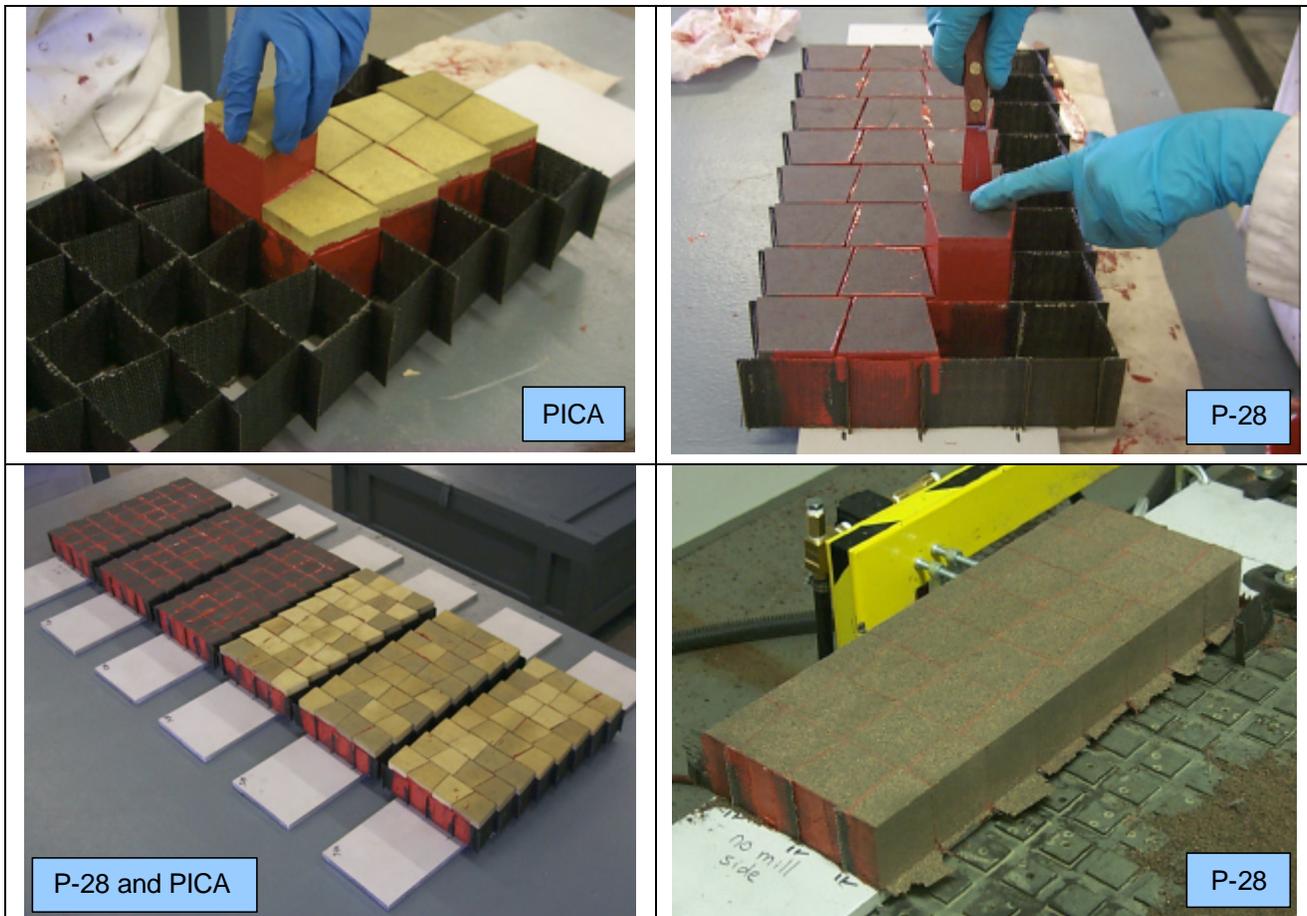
Production of PICA and P-28 Flexure Samples Showing Block Bonding and Final Milling
